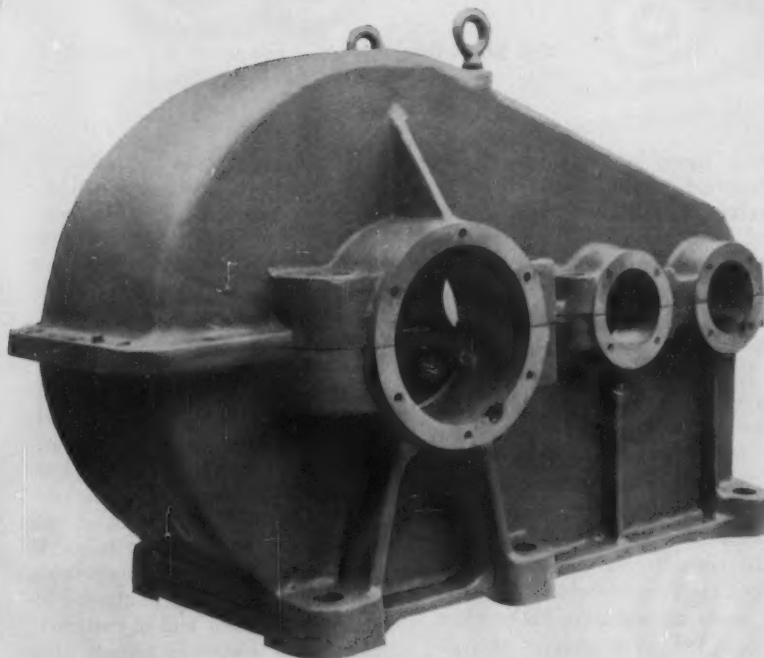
Speed reducer housing fabricated of 69 parts became . . .
